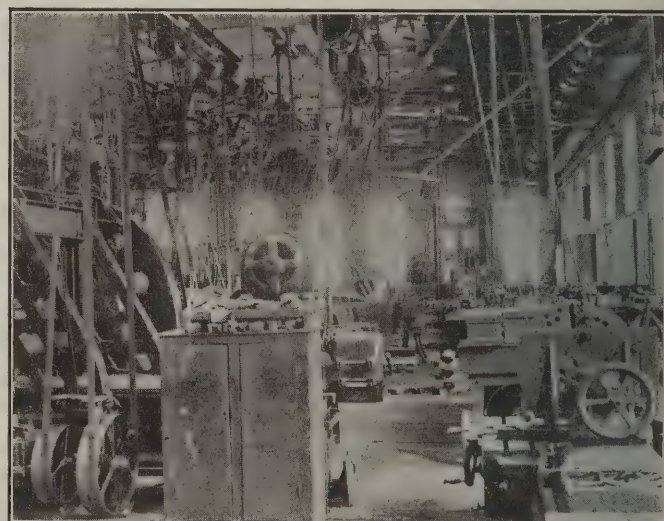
Typical Group Drive in Locomotive Machine Shops.
